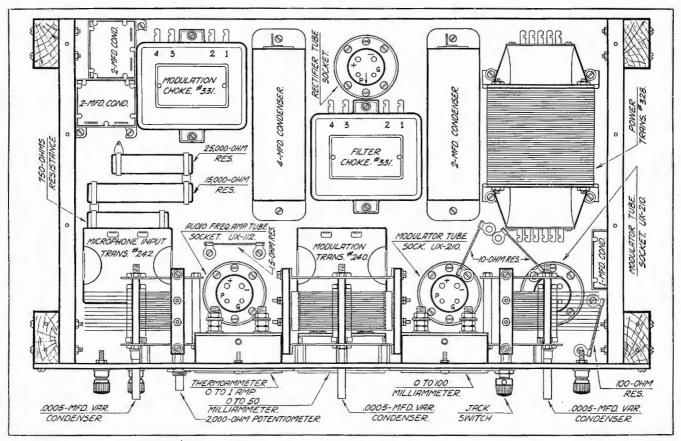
The baseboard layout shown above represents the manner in which parts should be placed on the lower shelf, where all of the power apparatus is located
